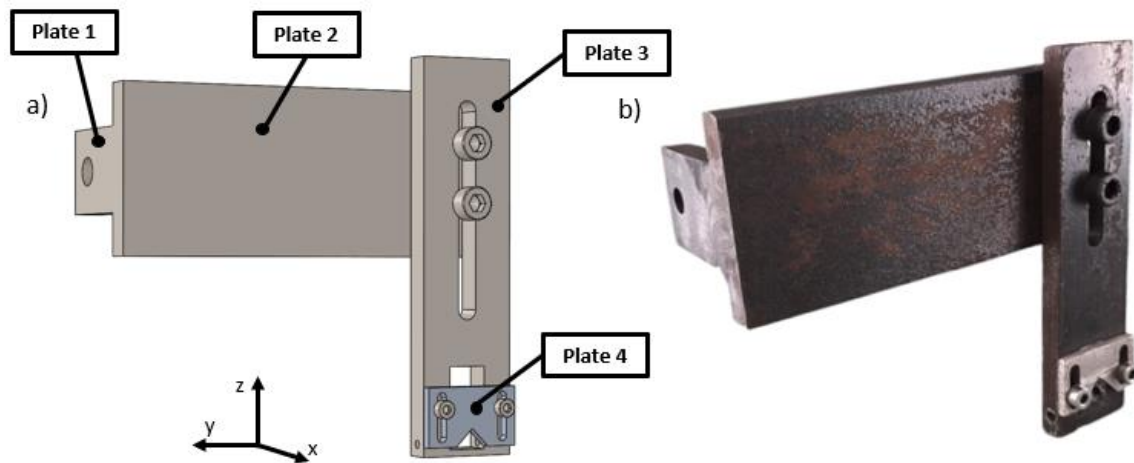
Guiding system for conducting FRAM tests: a) 3D CAD model; b) manufactured component.
